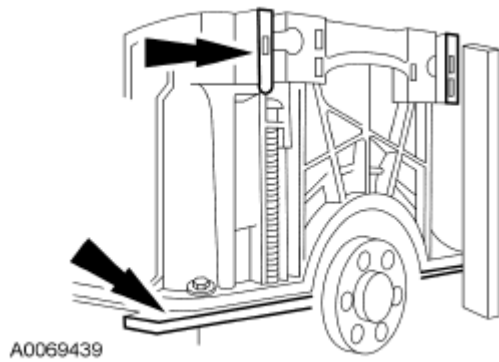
Using Straightedge To Align Transmission Face Of Cylinder Block Cradle With Rear Face Of Cylinder Block
